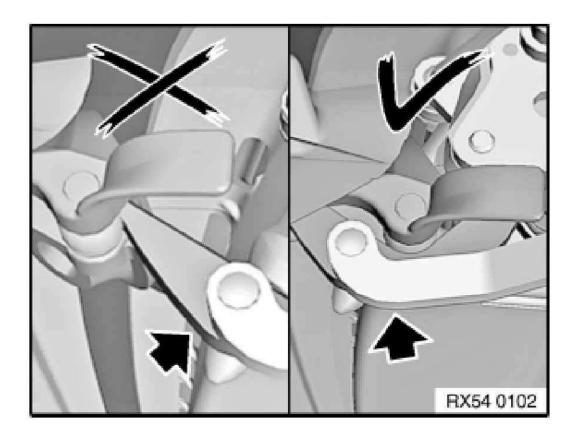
Opening Tension Bar And Closing Folding Roof Courtesy of BMW OF NORTH AMERICA, INC.
